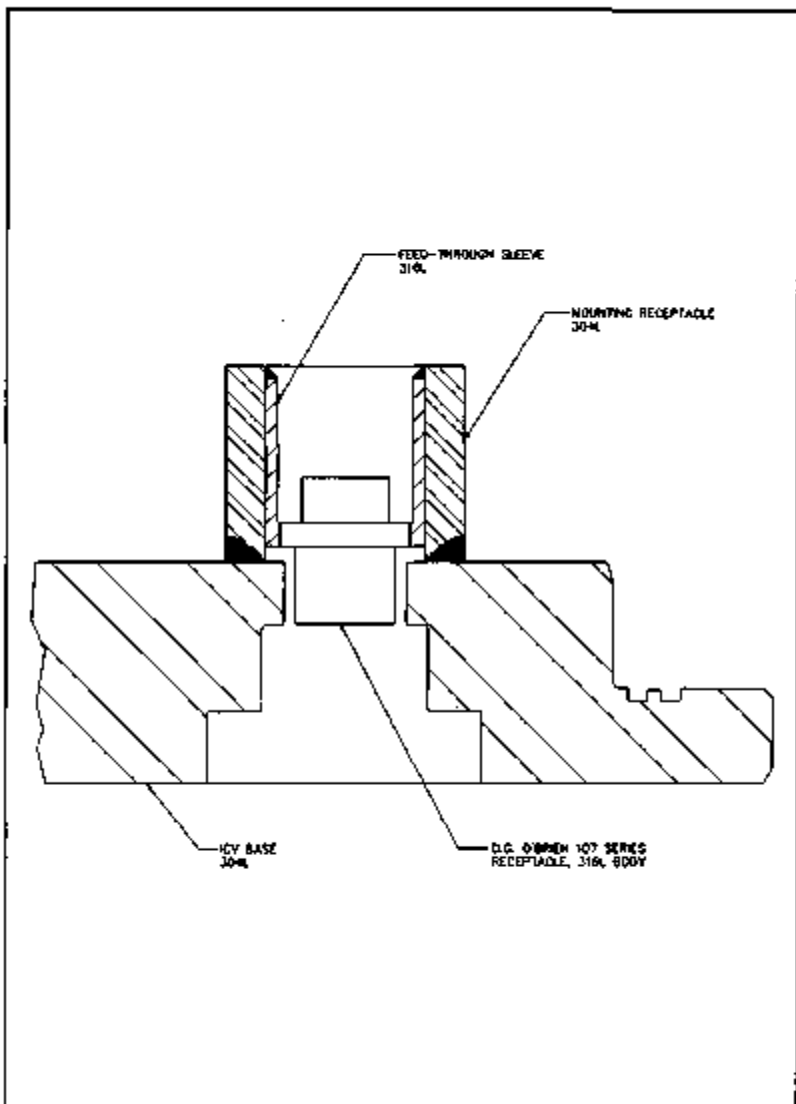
ICV Feed-through Containment Boundary Components and Welds.
